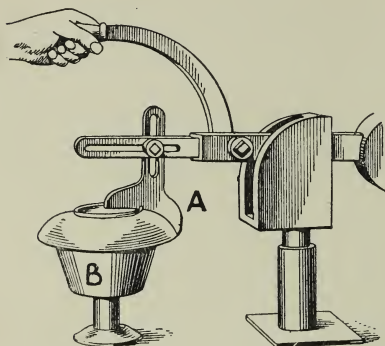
Shaping a Saucer.—A, Profile tool ;
